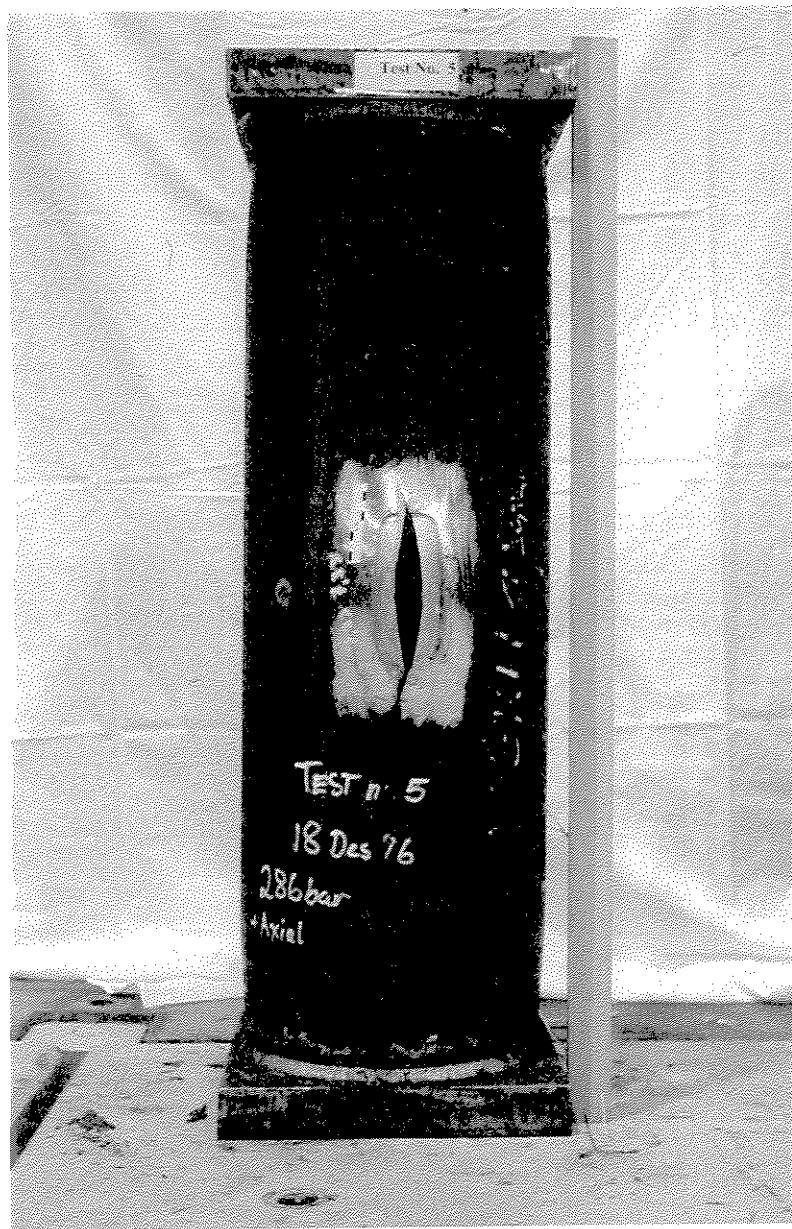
Picture of the test specimen no. 5 after the burst test
